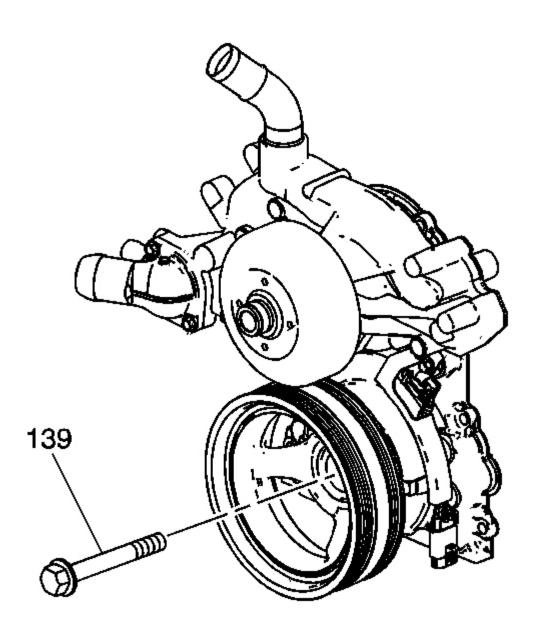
Crankshaft Balancer Bolt Courtesy of GENERAL MOTORS CORP.
